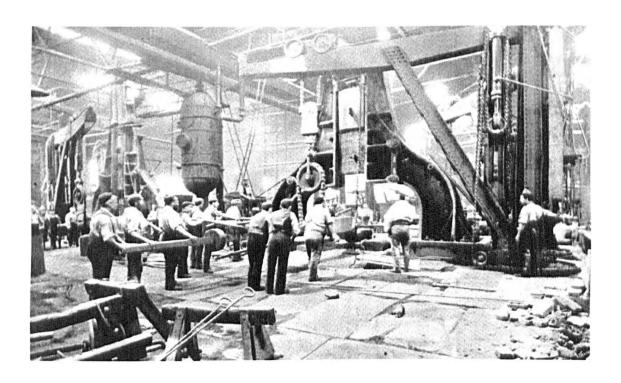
Vickers' hammer shop, one of the original buildings at the River Don Works.
